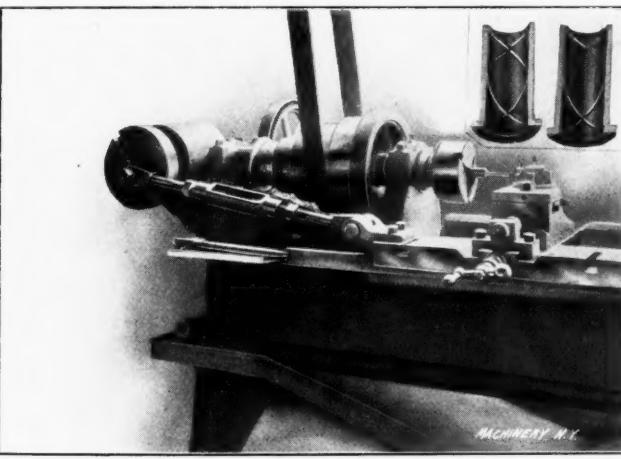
Machine for Grooving the Inside of Brass Bushings, and Sample of the Work Done.
